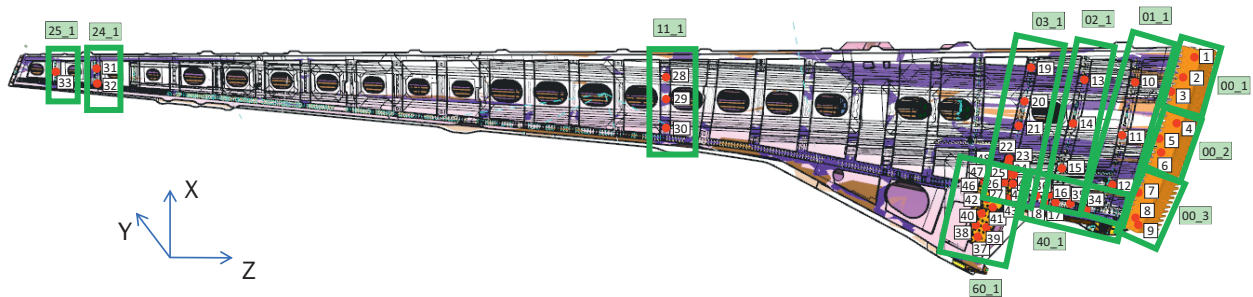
Schematic diagram of the hole machining zones in the test wing box
